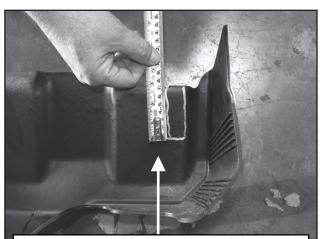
Models with flat tab, insert Bolt Plate down through hole. Attach Side Armor to Bolt Plate
